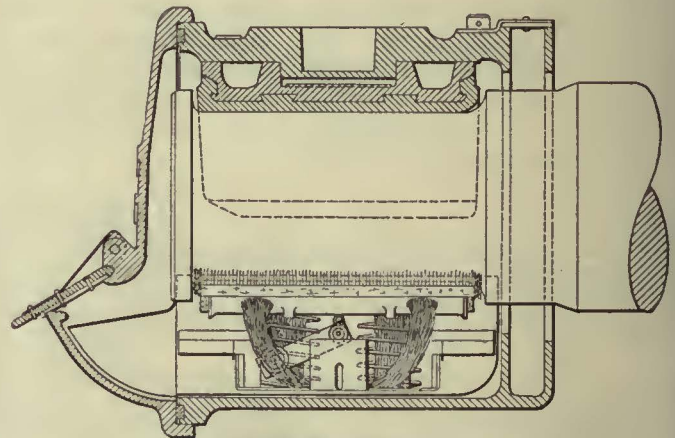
New-Type Journal Bearing Construction Used Under Freight Cars
